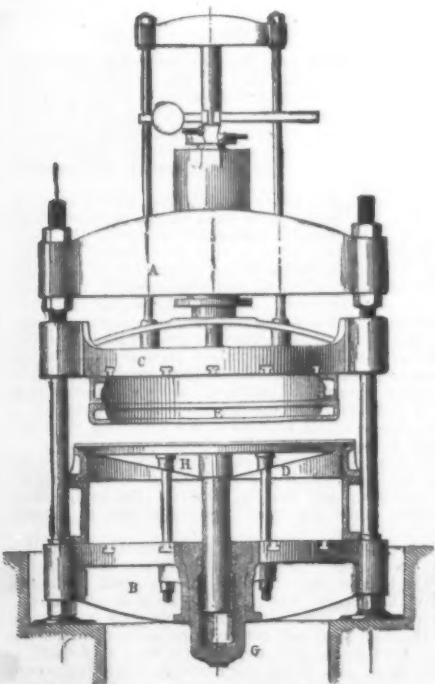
FIELDING & PLATT'S PRESS FOR STAMPING IRON PLATE.
